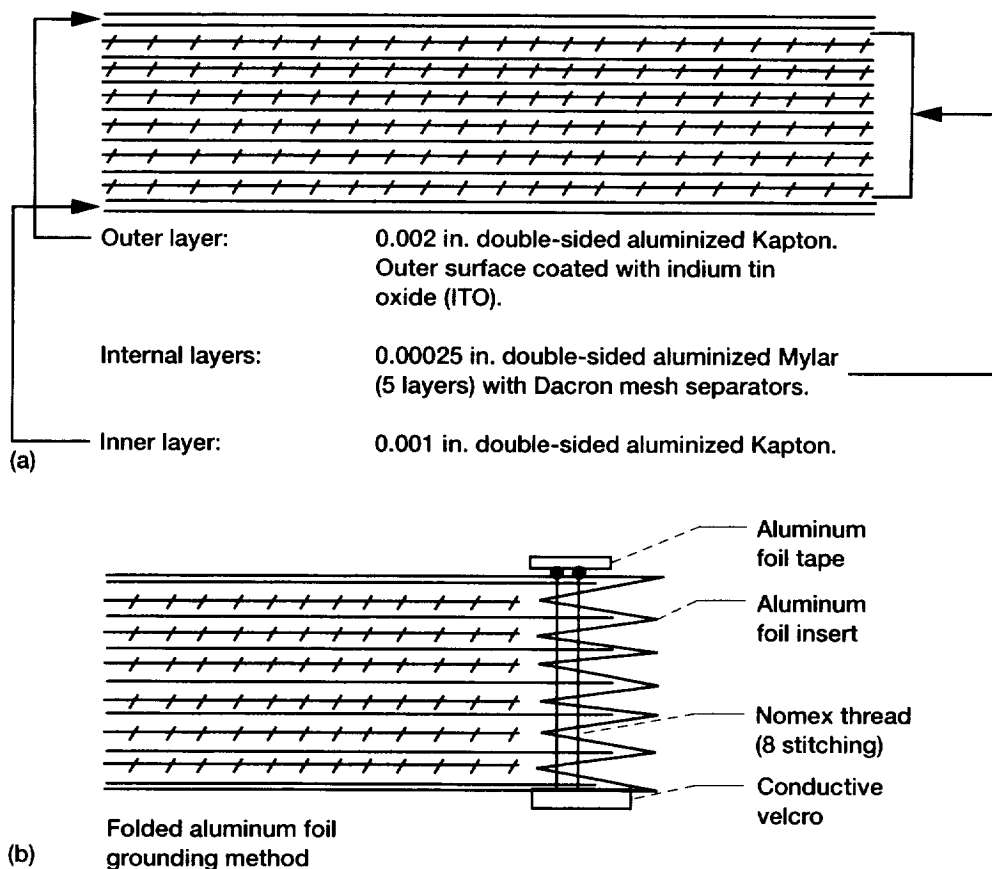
Typical multilayer insulation blanket details. (a) Blanket configuration. (b) Blanket grounding configuration.
